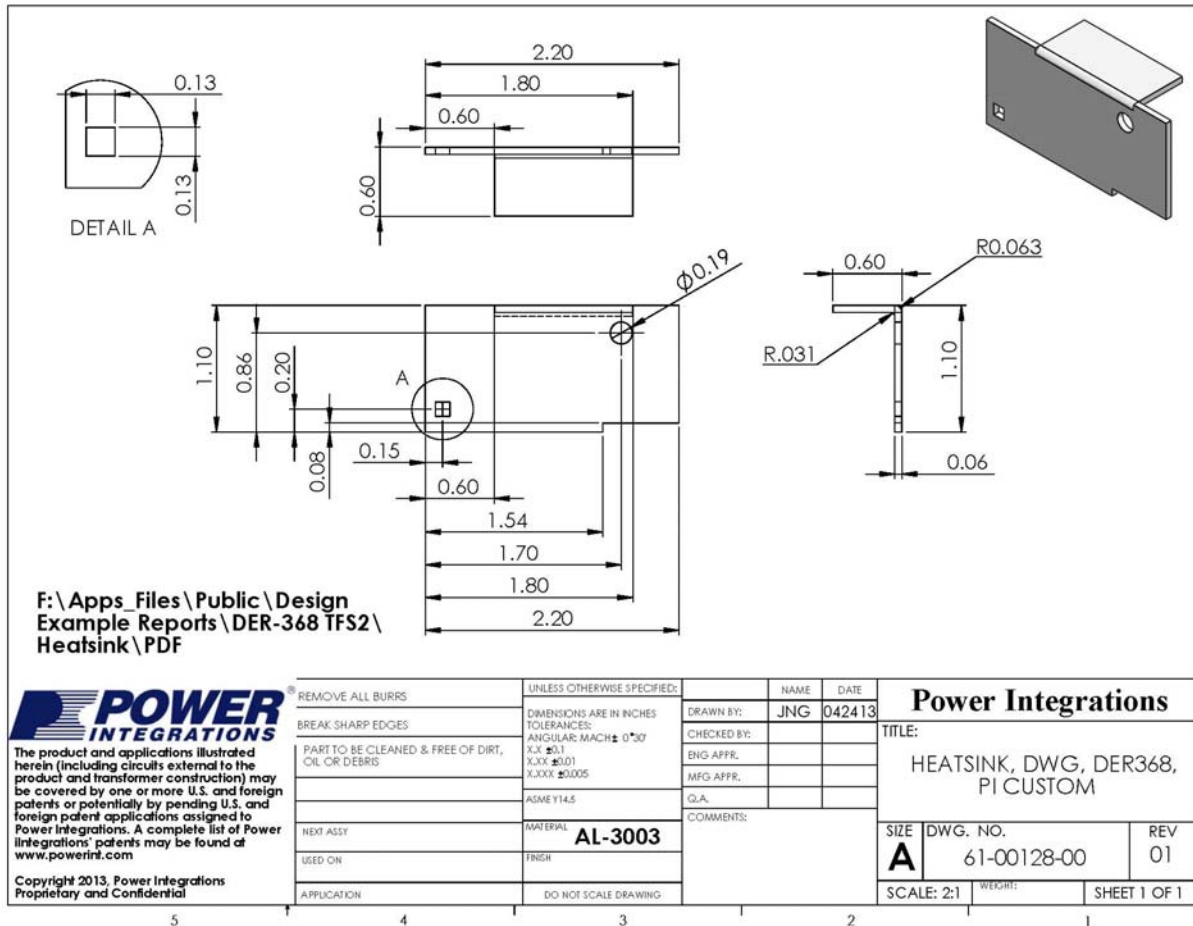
Primary Heat Sink Sheet Metal Drawing.
